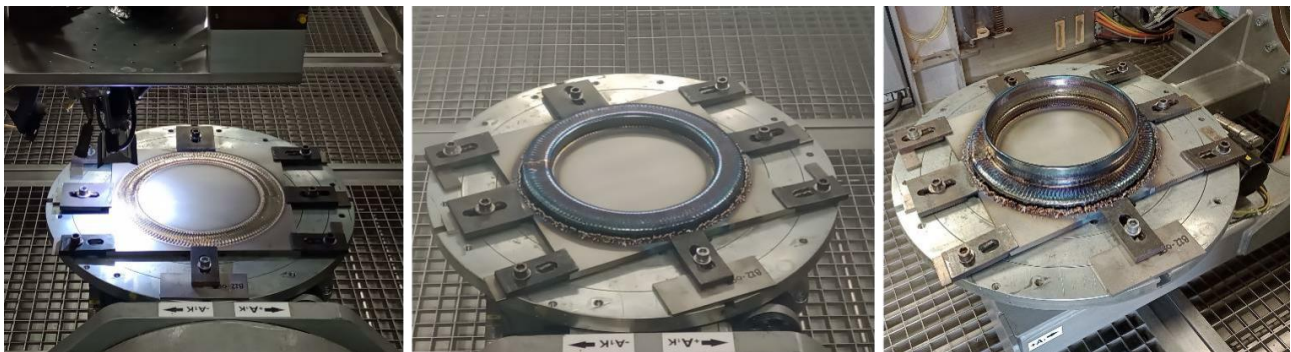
Pictures of the PMD process during the manufacturing of the lower flange section. From left to right: printing of first layer; finished lower flange; finished section, with flange and cylinder.
